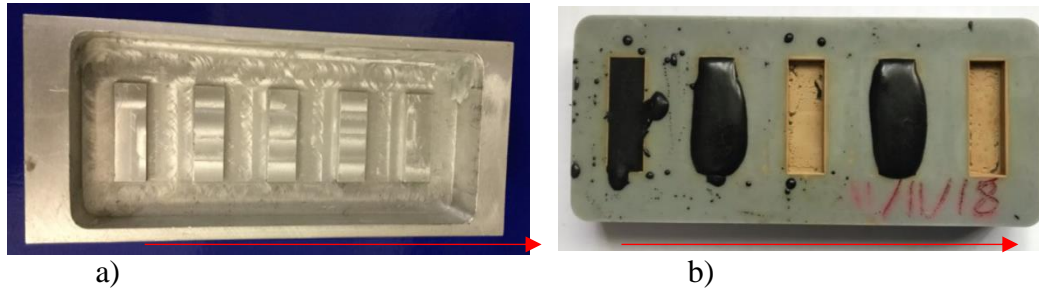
(a) Negative mould resulting in (b) Positive mould, depicting the effect given due to the handmade composites, resulting in irregular shapes of moulds.
